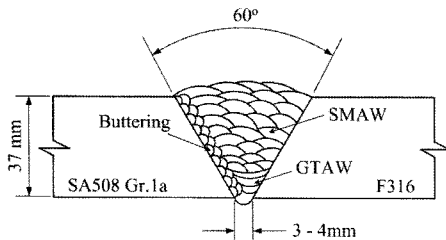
Schematic diagram of the dissimilar metal weld design and welding procedure.
